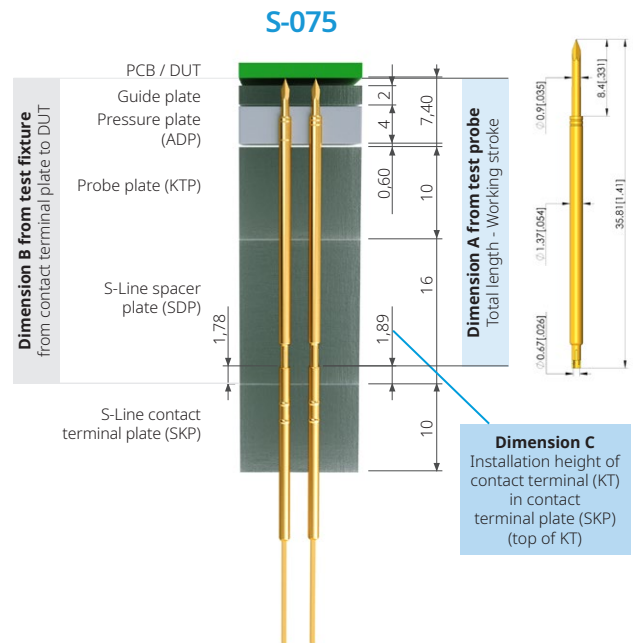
S-Line concept with required plates and dimensions. Example using wire-wrap probes
